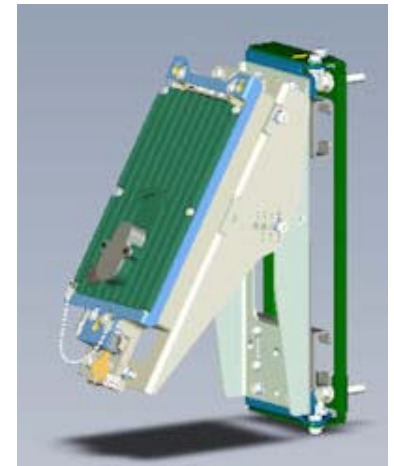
9764 Metro Dock wall mount (with tilt)
